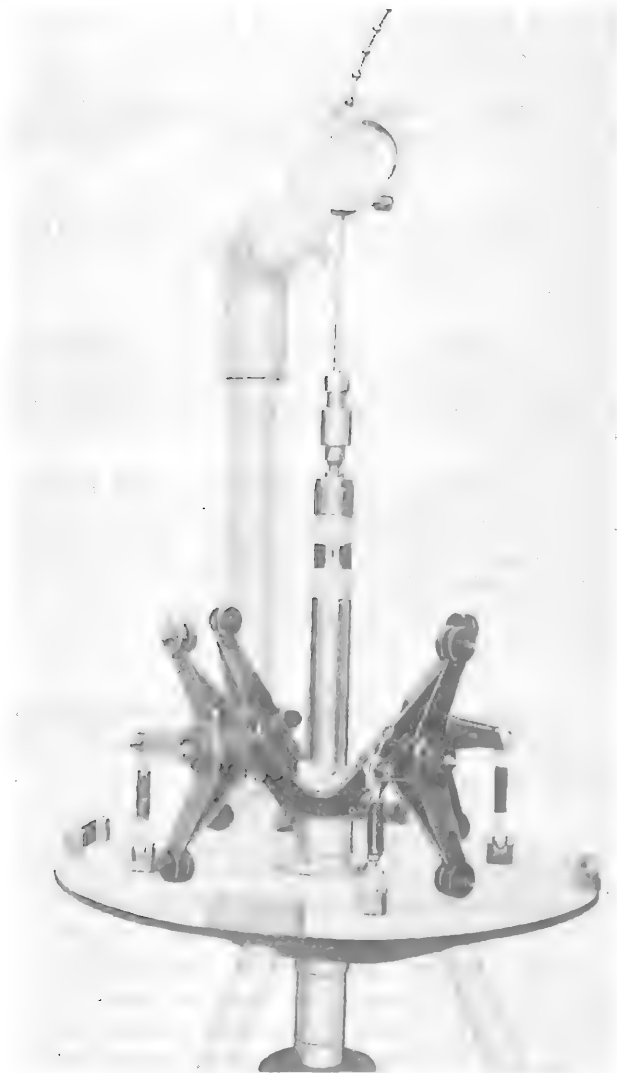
Balancing Counterweight Assembly with Marvel Balancing Kit
